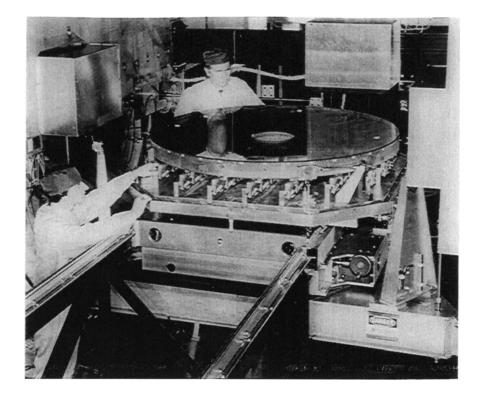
Photograph of the 1.5-m (60-in.) diameter mirror and multipoint mount used to prove the manufacturing and testing processes for making the full-sized HST primary mirror. (From Babish and Rigby.²⁶)
